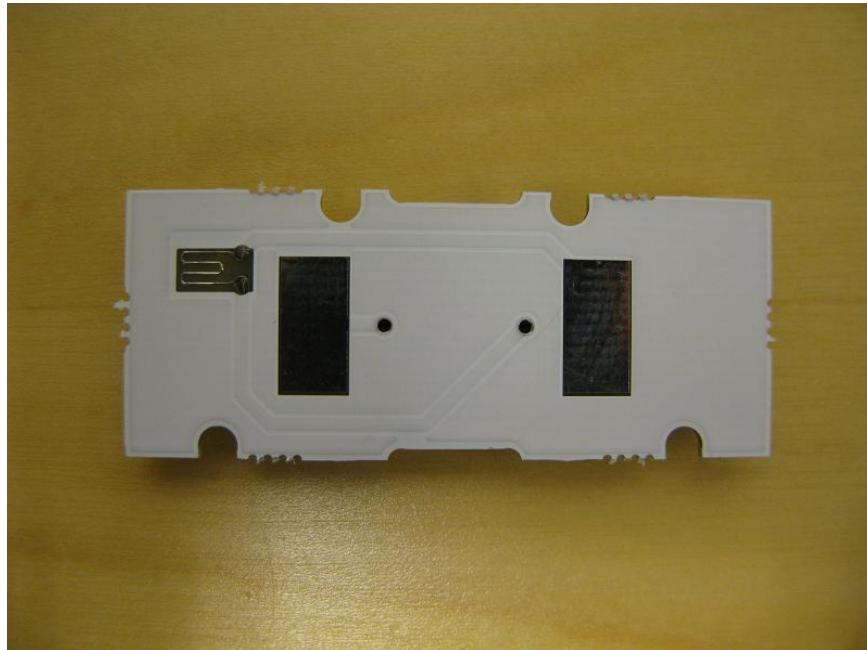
Front side of the printed circuit board of rectangular SMLR (345.600)
